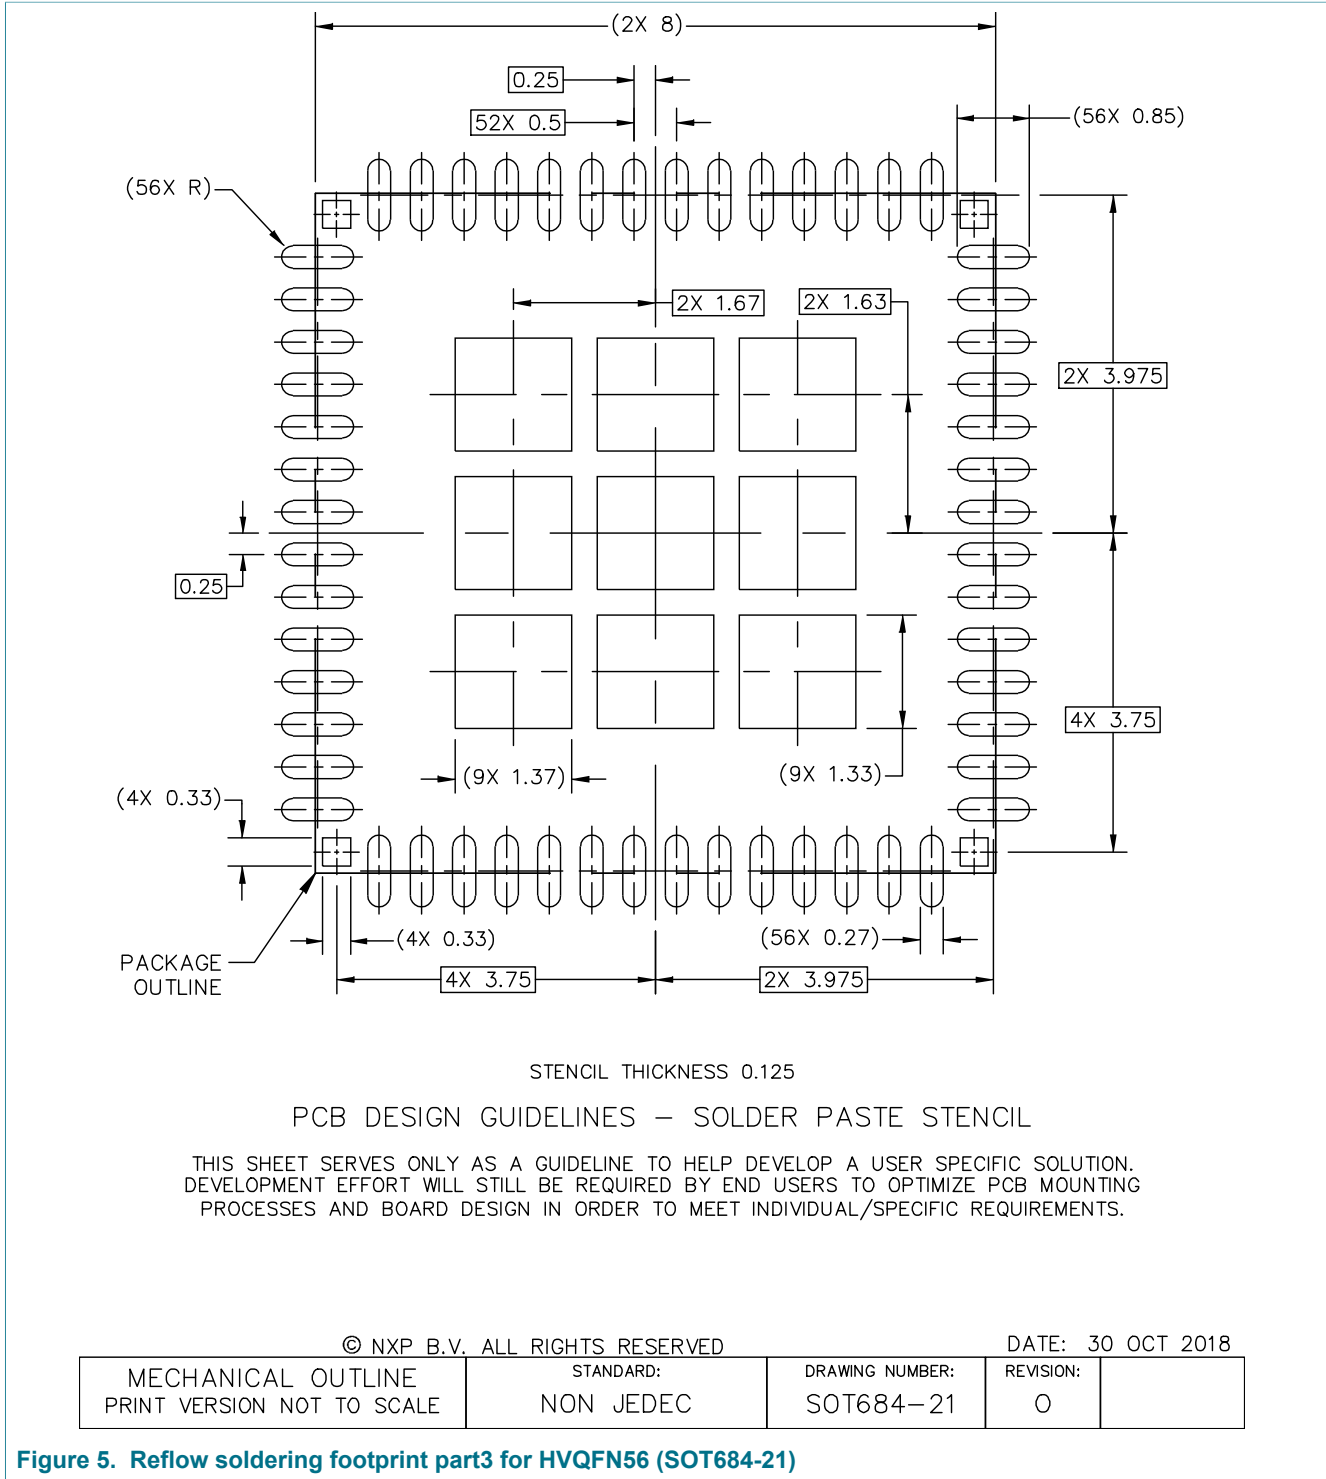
Reflow soldering footprint part3 for HVQFN56 (SOT684-21)
